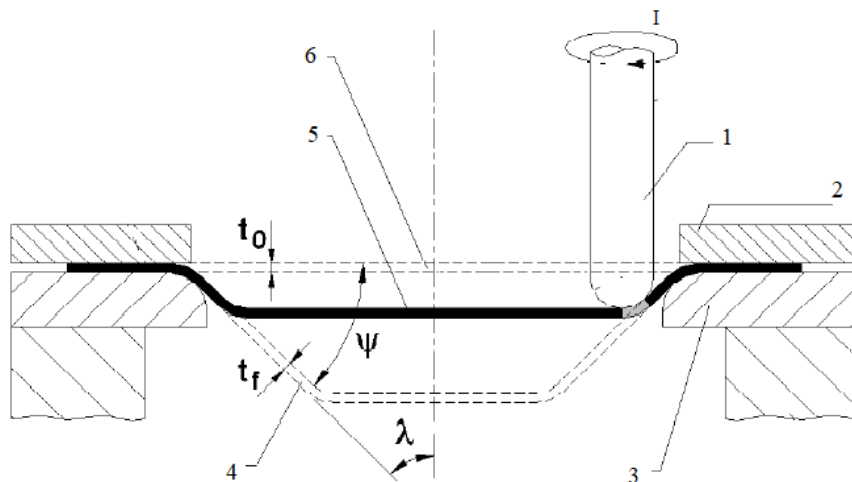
Schematic representation of the incremental forming process in a single point, [13]: 1 – the forming tool; 2 – clamping device; 3 – support plate; 4 – final piece; 5 – the intermediate shape of the part; 6 – semi-finished sheet metal; I – rotational movement of the tool
